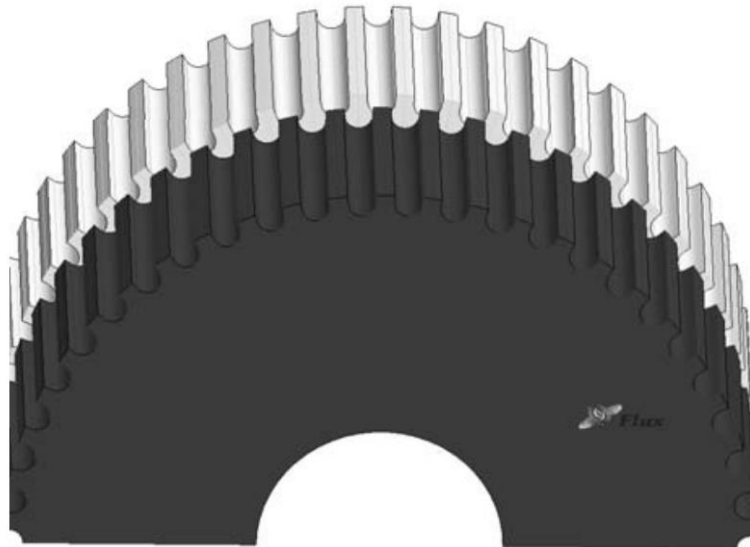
the rotor structure of a hybrid stepper motor [62]
